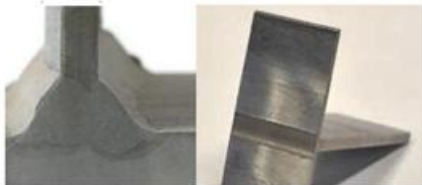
A Traditional fillet joint versus FSW T-joint geometry
